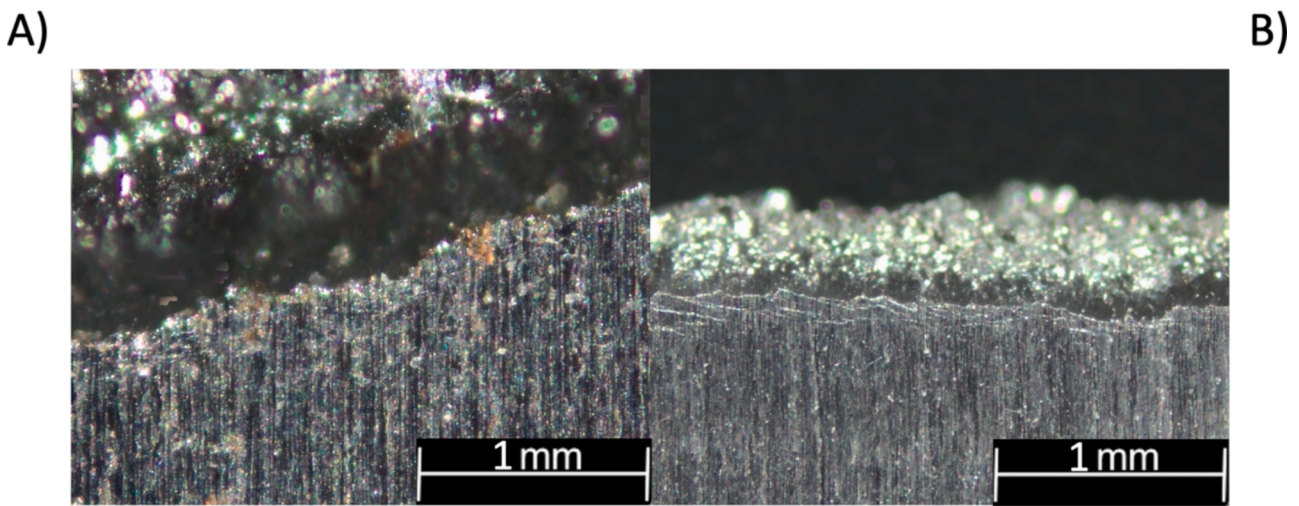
Surface Edge side view of Additive Manufactured CT Specimen Crack, A) 0° and B) 45°.
